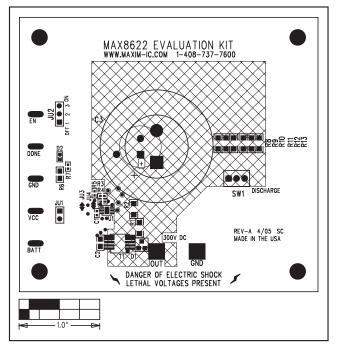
MAX8622 EV Kit Component Placement Guide— Component Side
